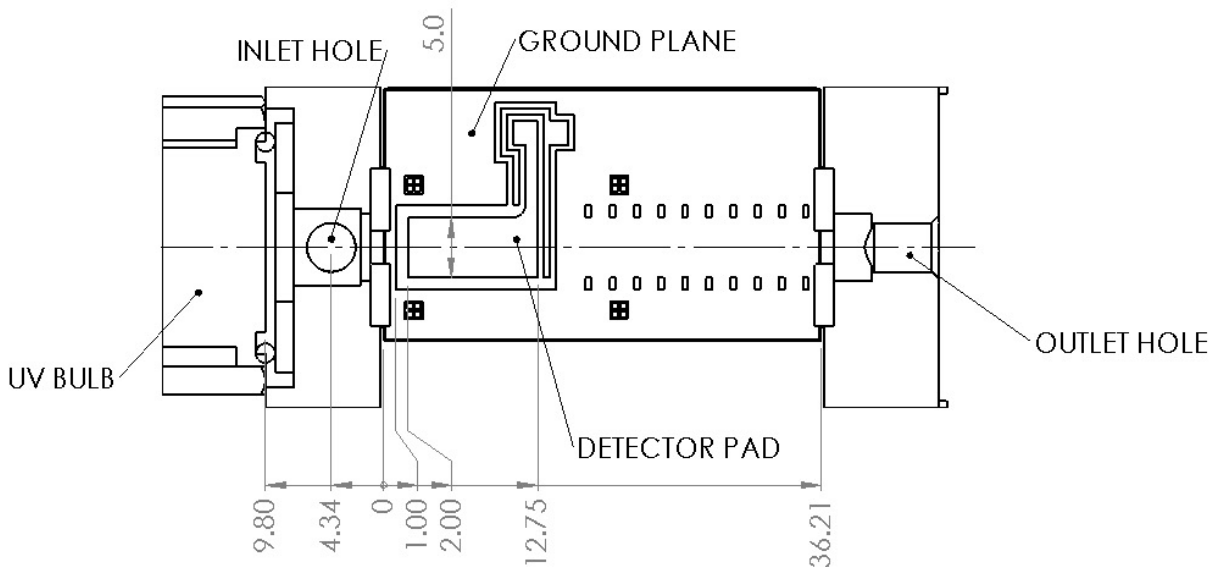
Detailed dimensions (in mm) of the fixtured μ DC device
